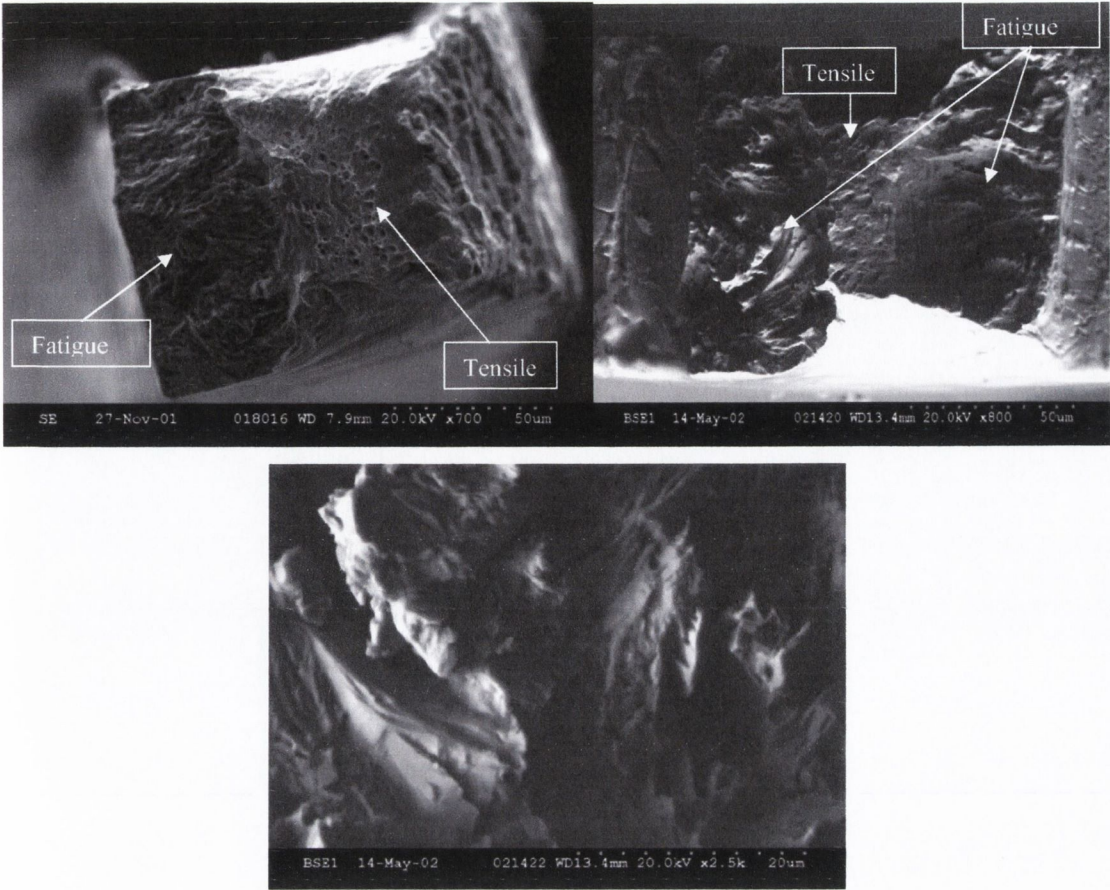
Fatigue fracture surface of a plain wire
